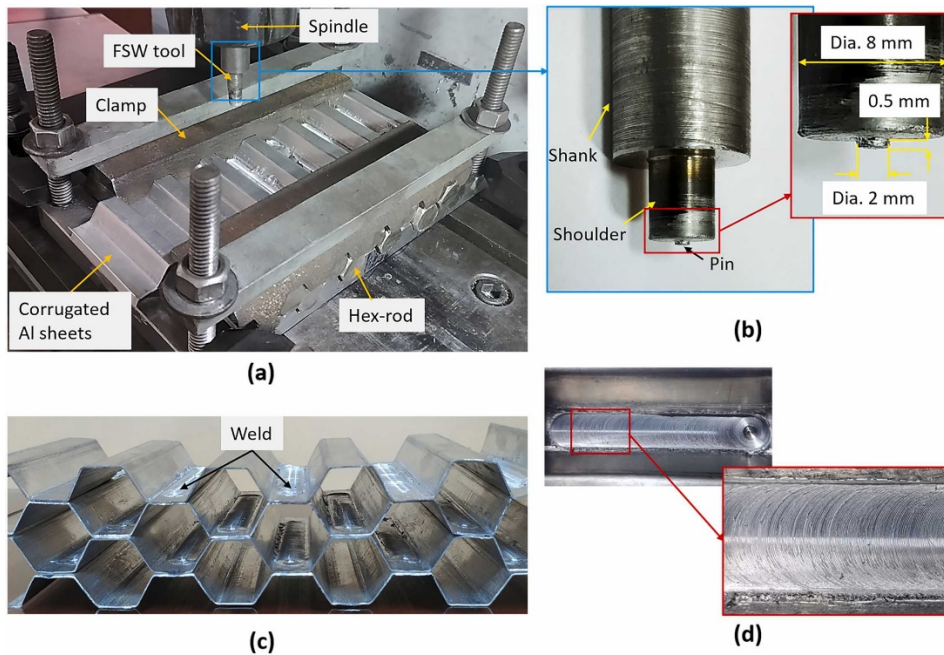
Honeycomb structure manufactured by FSW. Reprinted from Journal of Materials Processing Technology, Vol 330, Ananta Dutta, Surjya K. Pal, Sushanta K. Panda, *Friction stir seam- and spot-welded aluminium honeycombs: Enhanced structural integrity eliminating adhesive bonding challenges*, pages 118449., Copyright 2024, with permission from Elsevier. [18]
